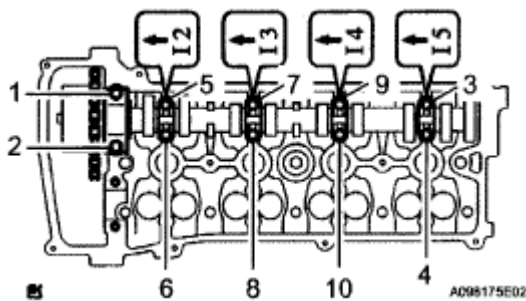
Identifying Bearing Cap Bolts In Sequence
